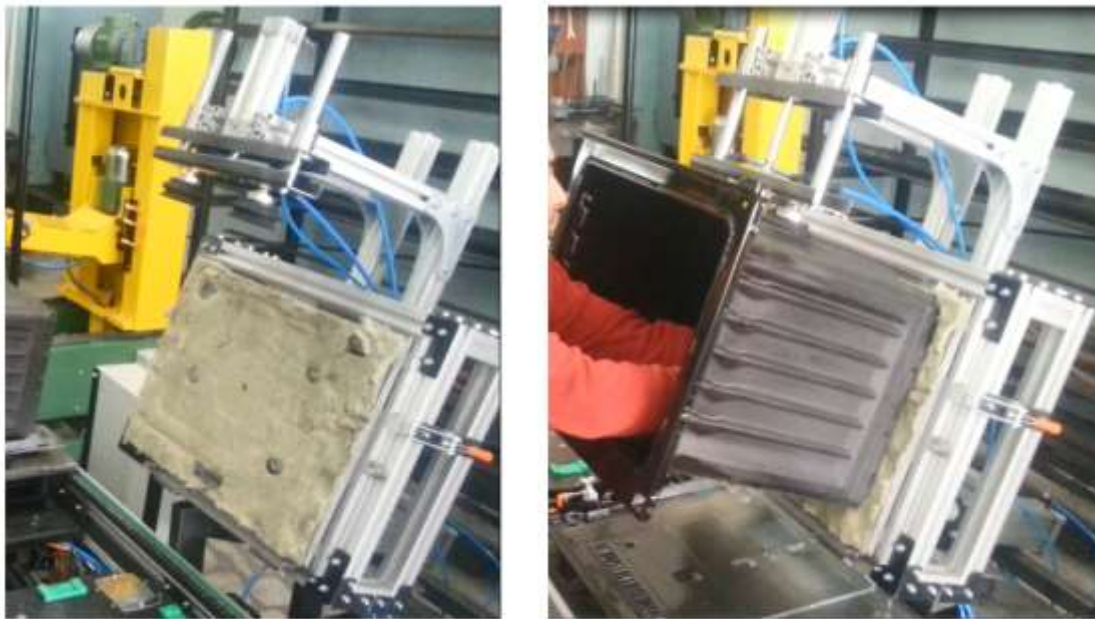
Circulation motor grouping sheet assembly at the right height and angle
